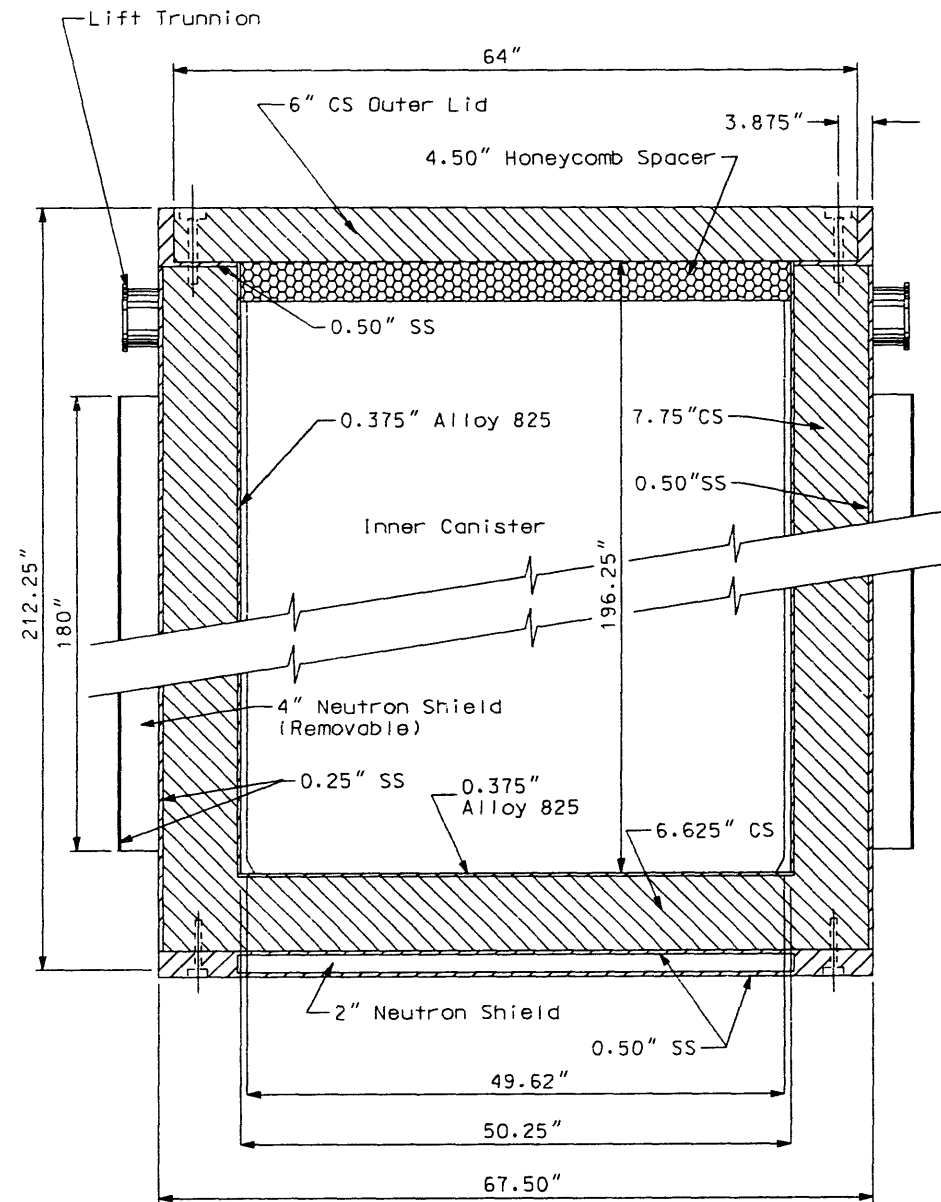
90-Ton MPU Outer Body (Side Section View)
